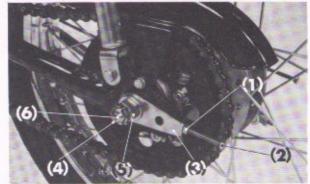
(1) Lock nut (2) Drive chain adjusting
